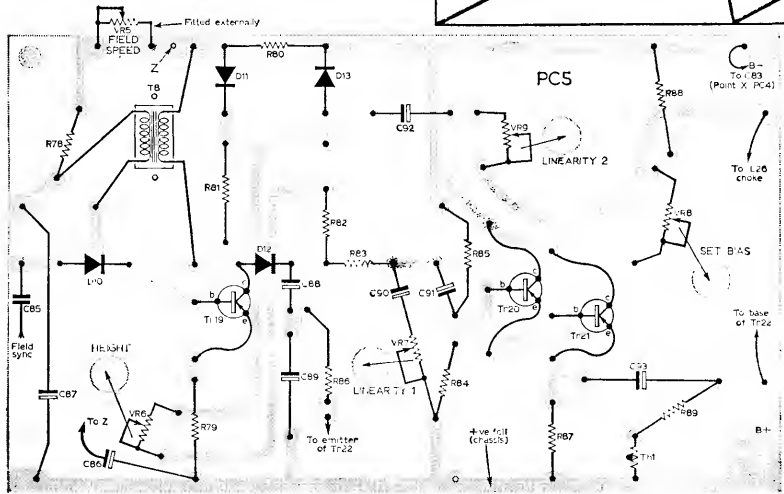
(below). The printed board for the field-scan generator (PC5). The copper parts are shown shaded.
